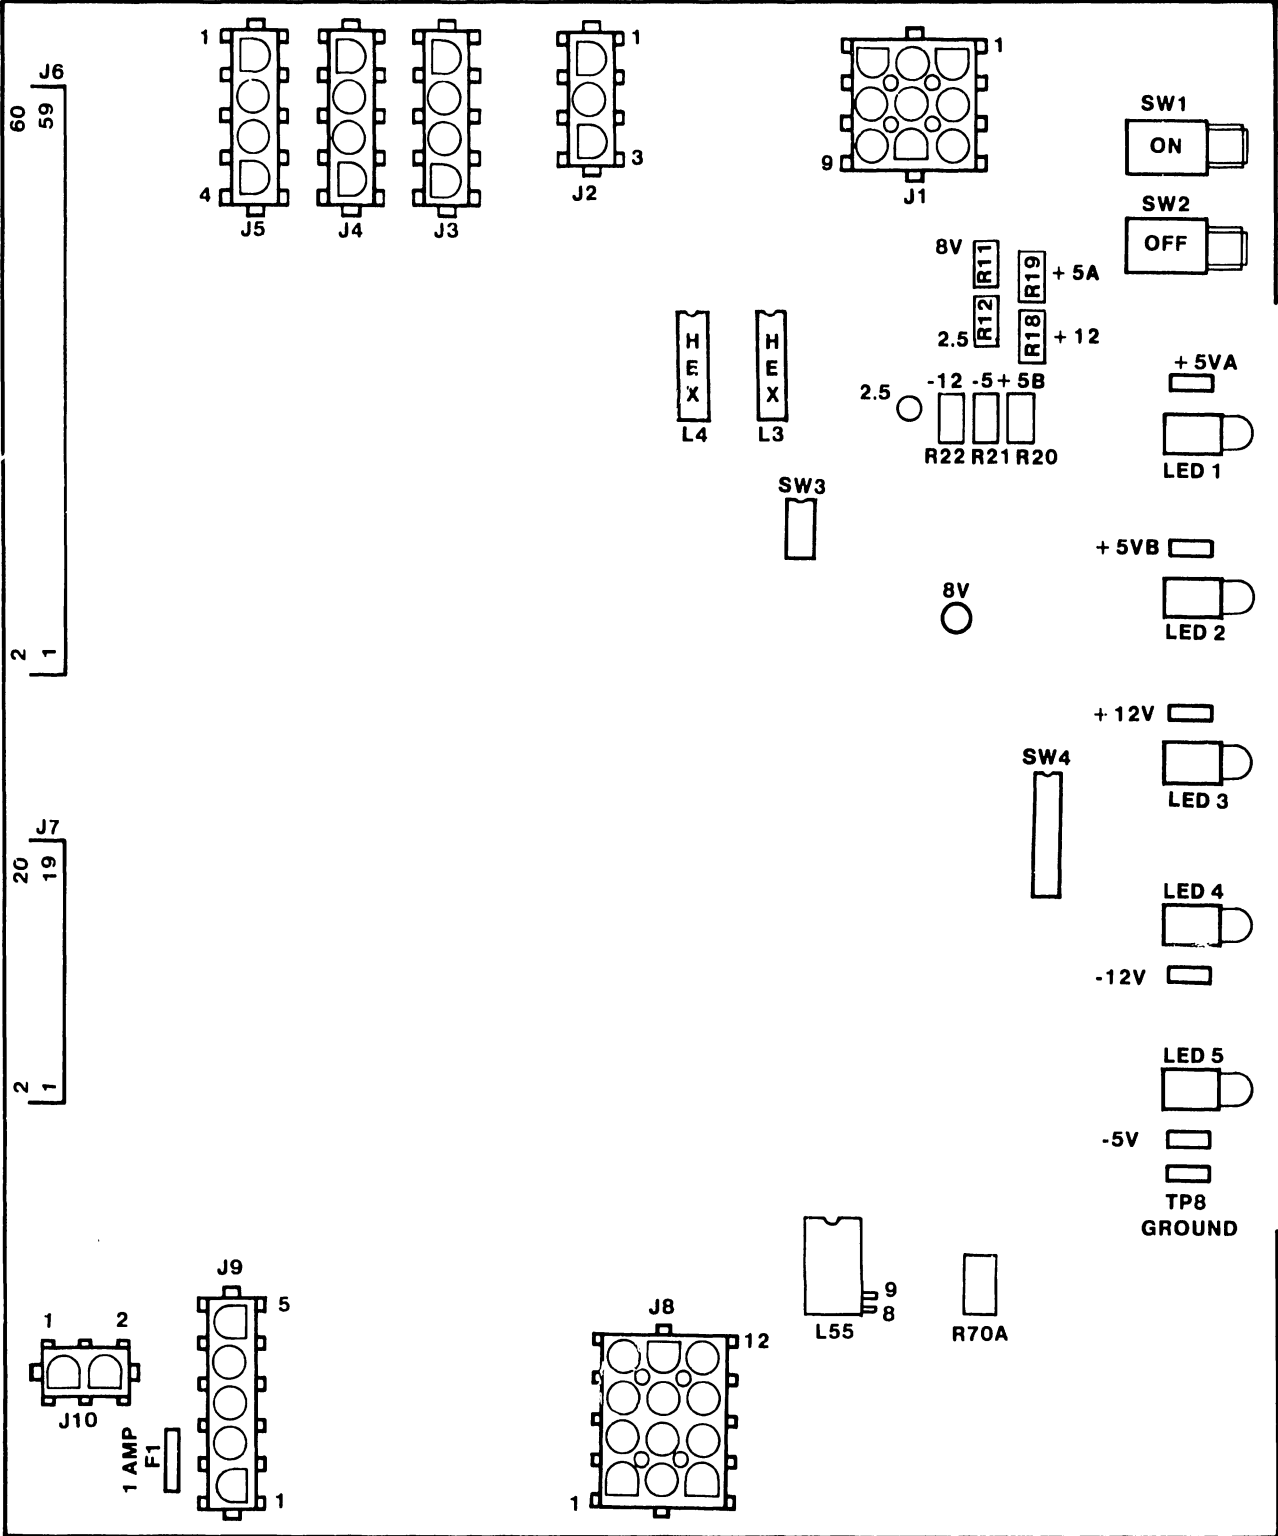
Front View - Power Supply Controller and Battery Backup Assembly
